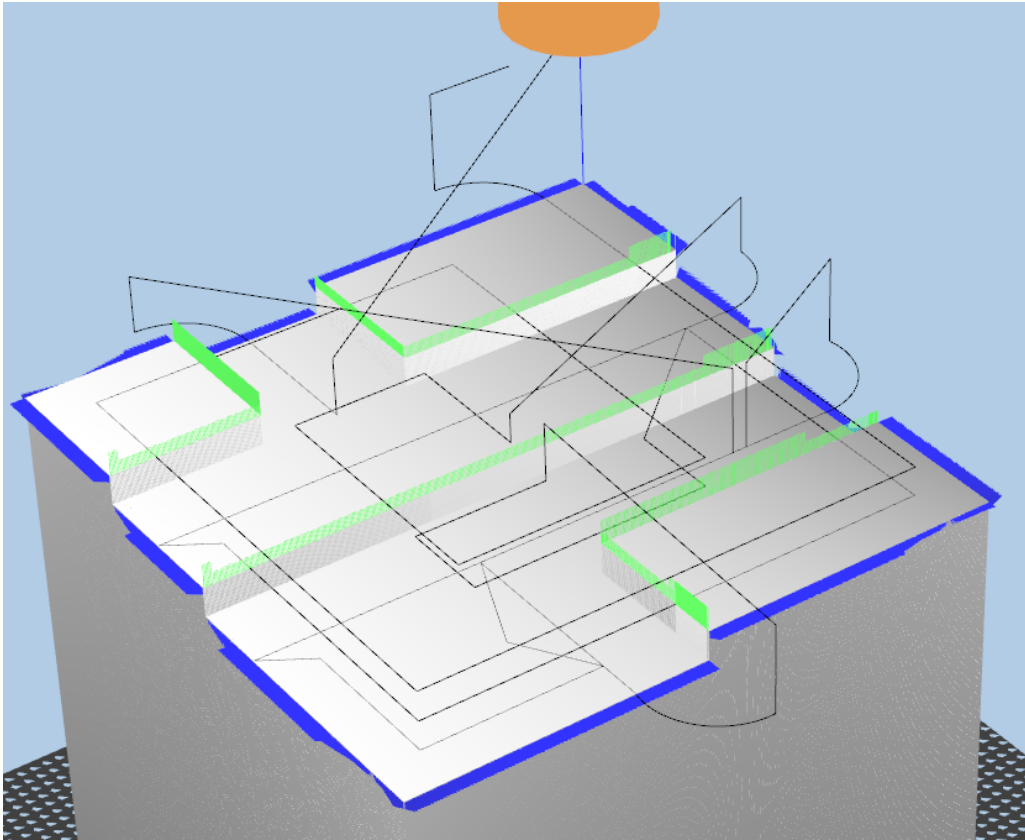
Tool path C in down milling (burr height = 500 μm).
